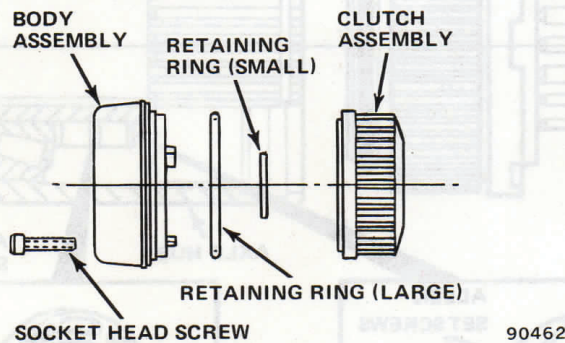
M246 Hub Body and Clutch Assemblies
